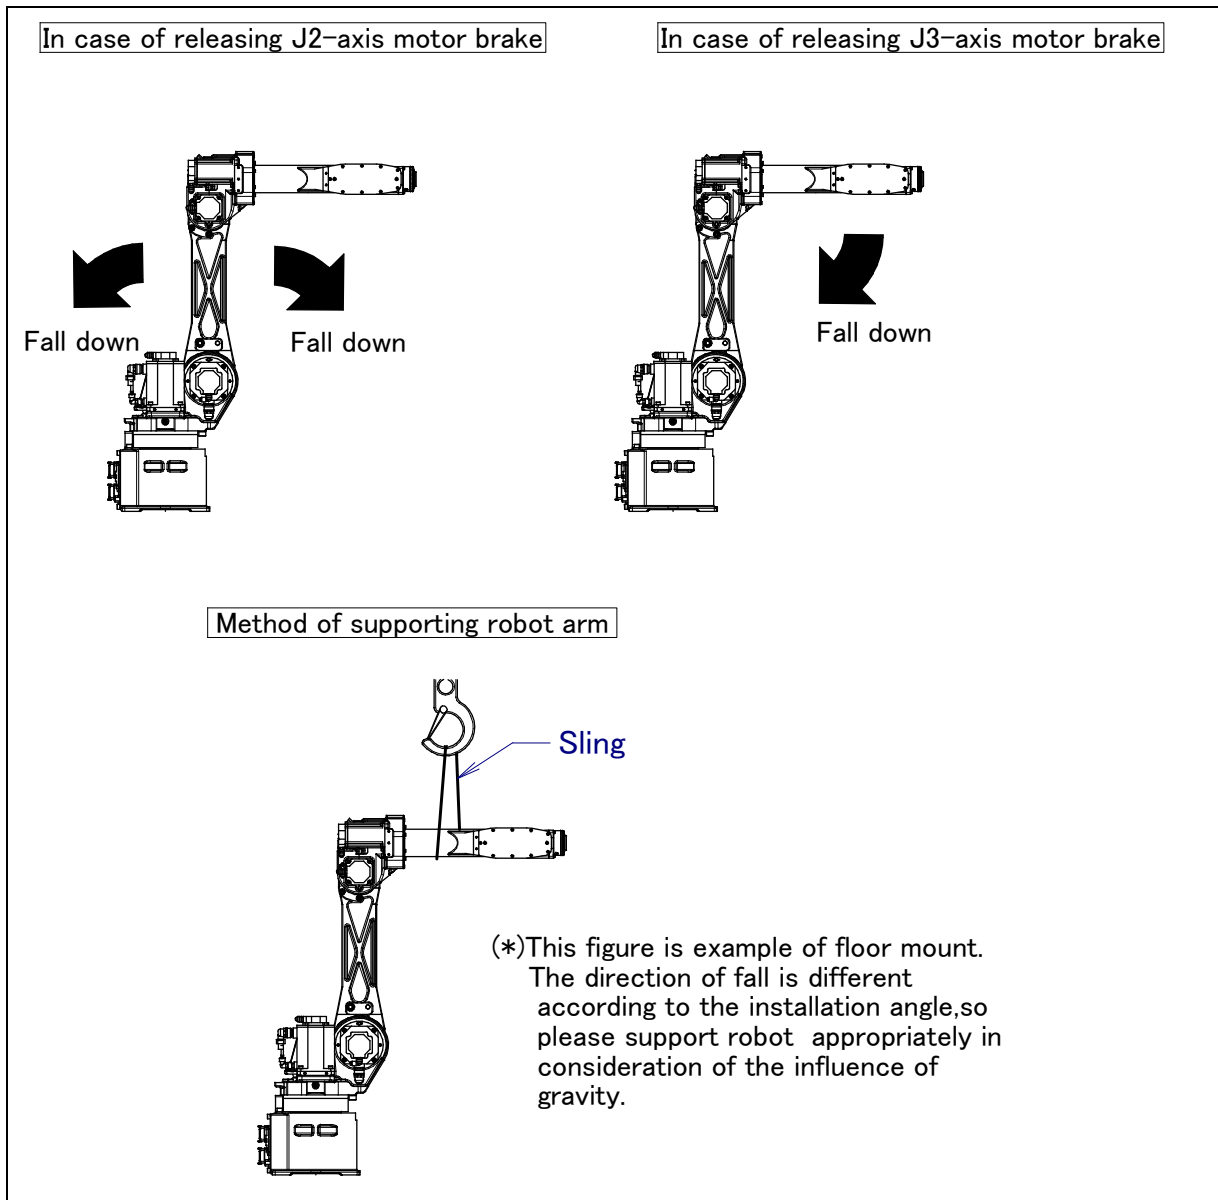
(a) Releasing J2 and J3 motor brake and measures
